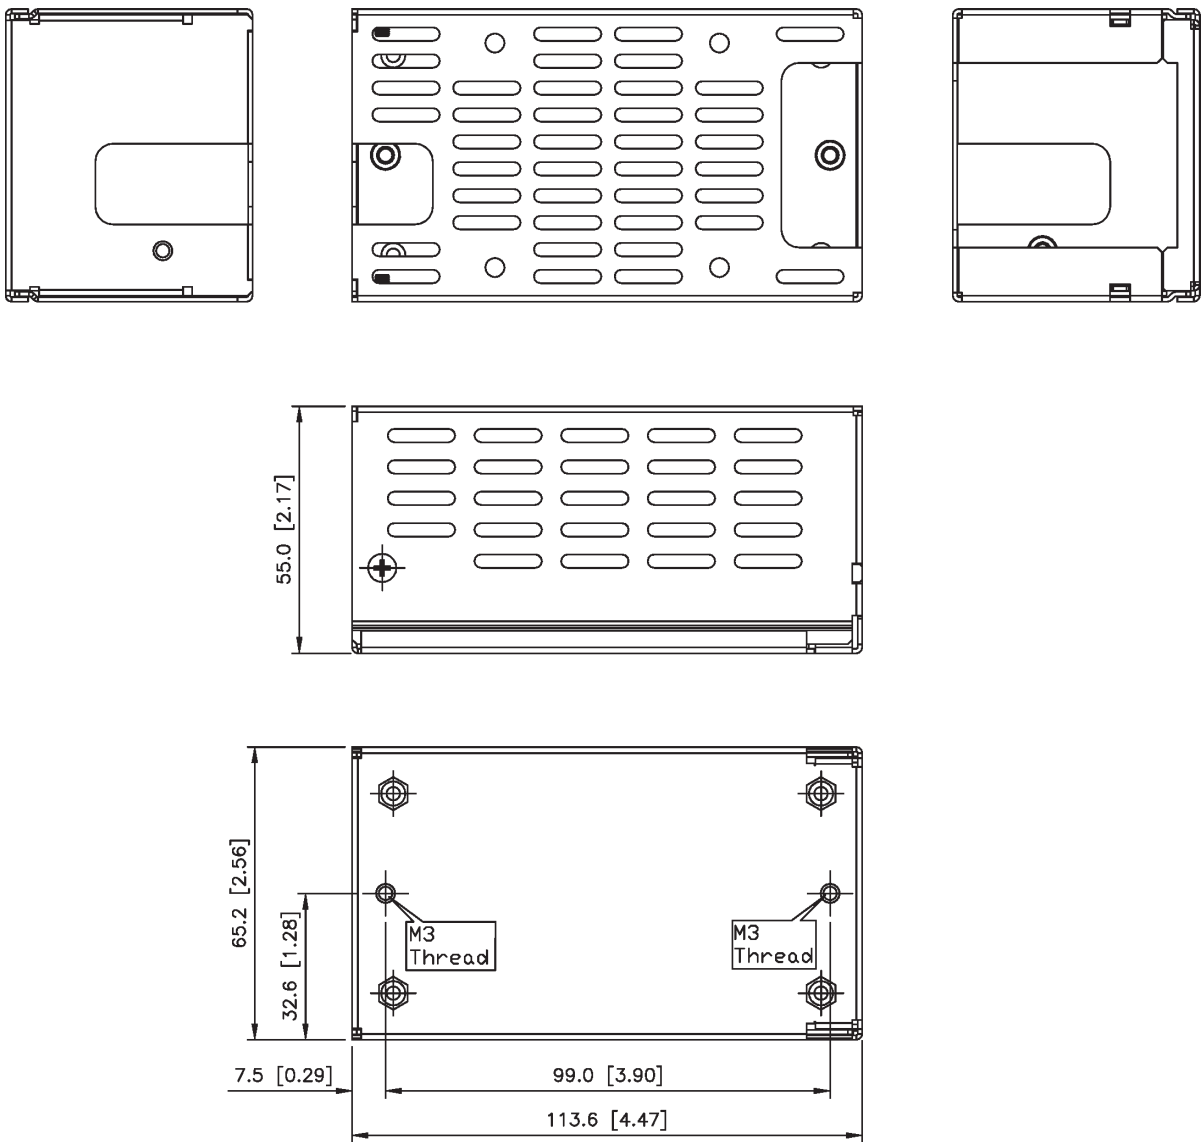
Mechanical Drawing – MEPG300-0XXX-U
